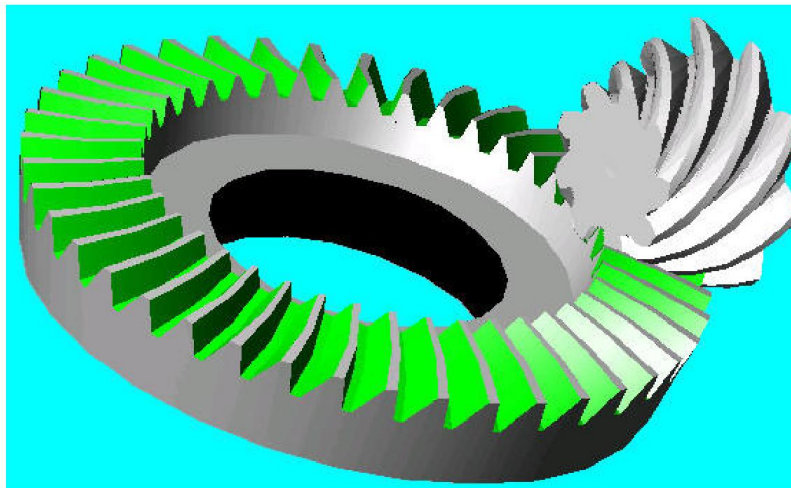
Hypoid Large and Small Wheel Assembly Drawing
